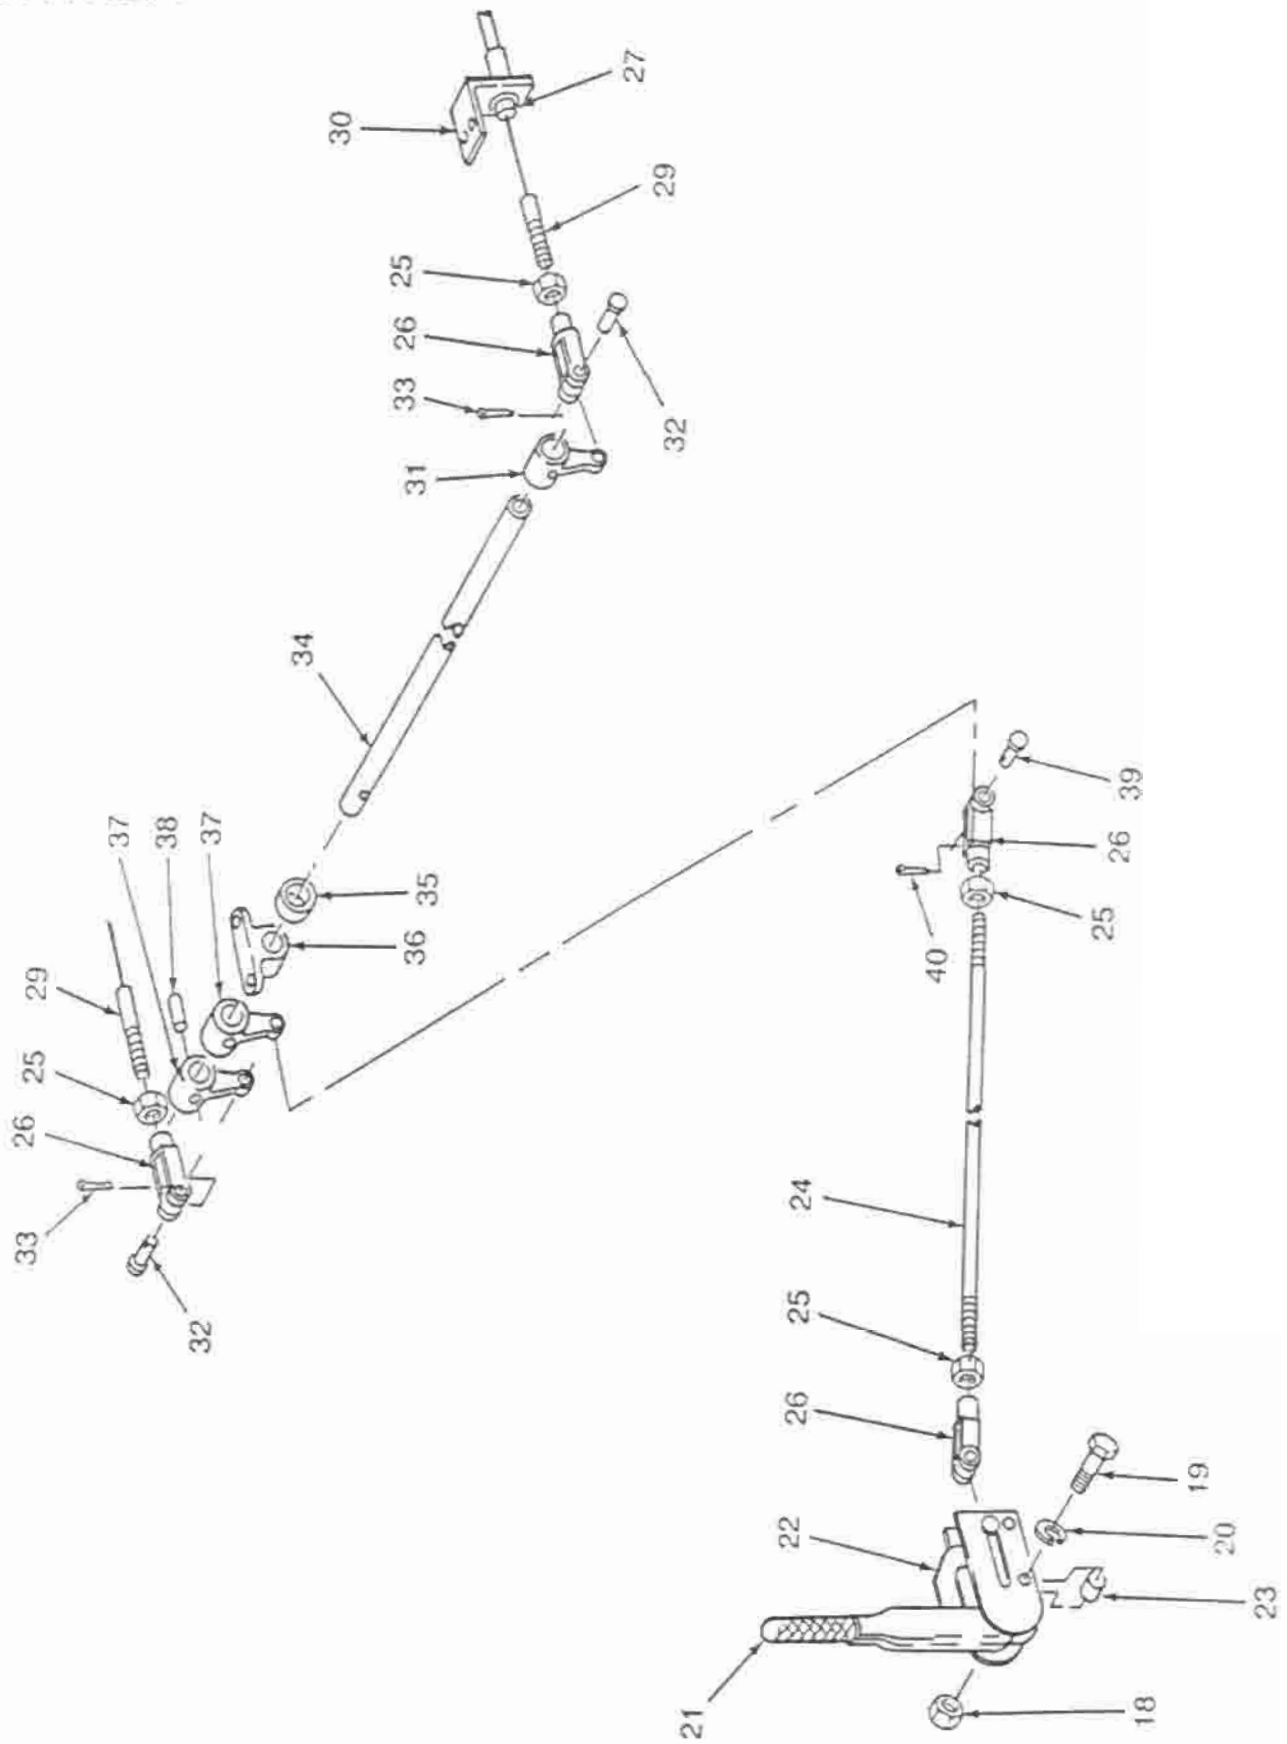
Hydraulic And hand Brake Connections (Sheet 2)
